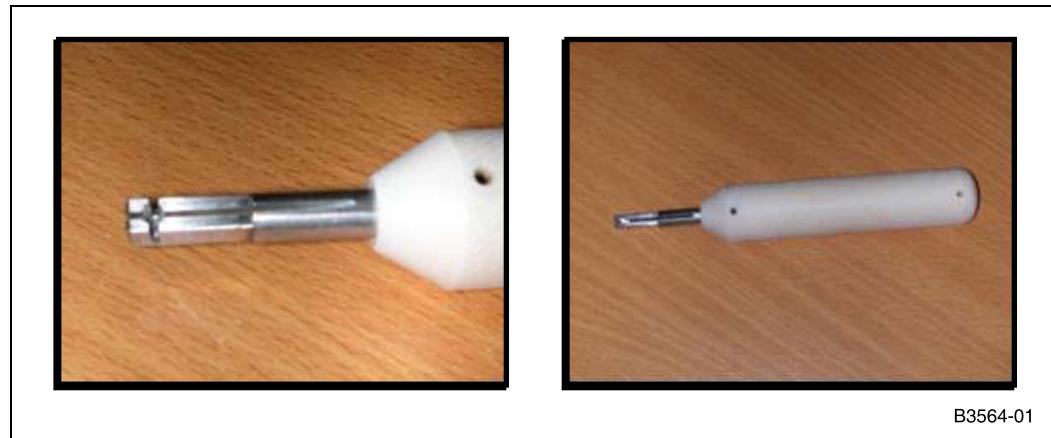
Hand-Tool on Heat-Sink Clip Assembly
